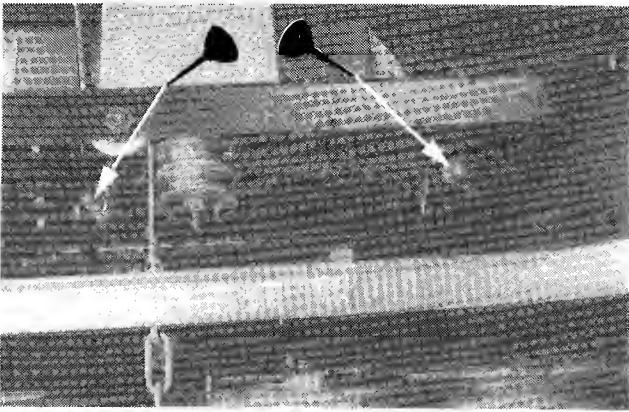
Lube Points Where Rods Contact Other Parts & Lever Pivot Points
